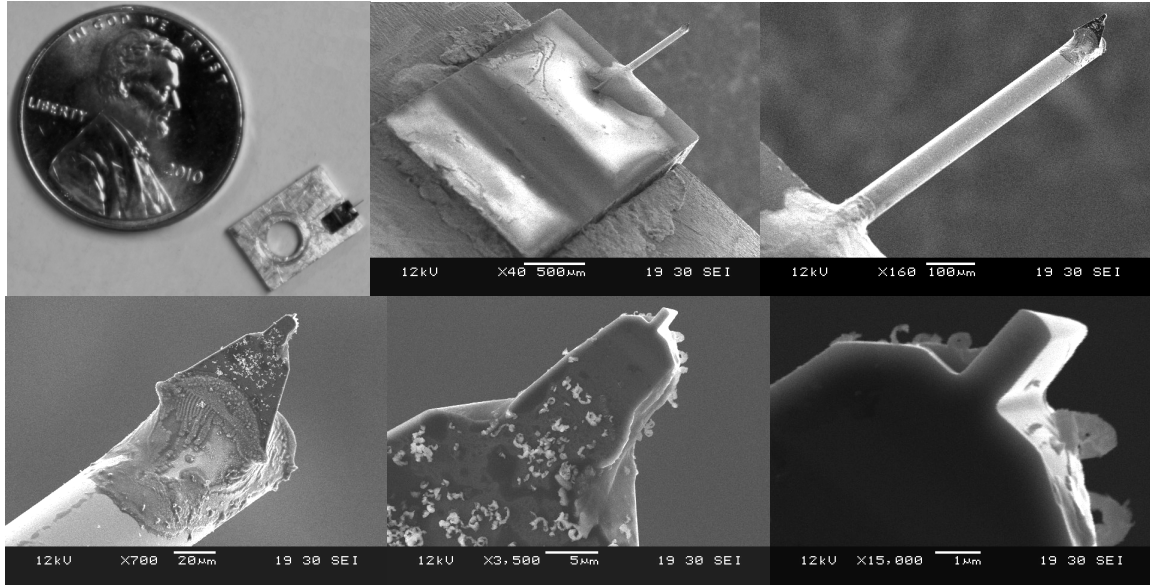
Example FIB machined flexible diamond tool with a rectangular rake face
